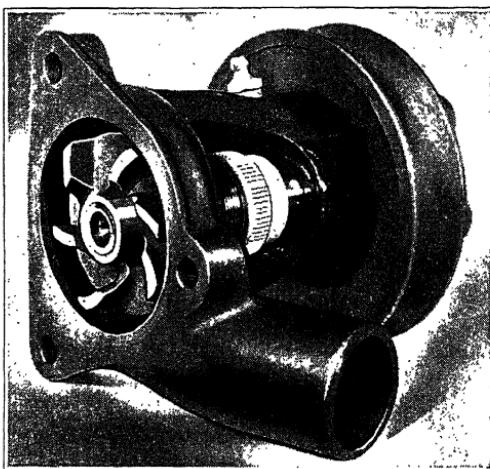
Six-Vane Water Pump Mounted on Needle Bearing.
